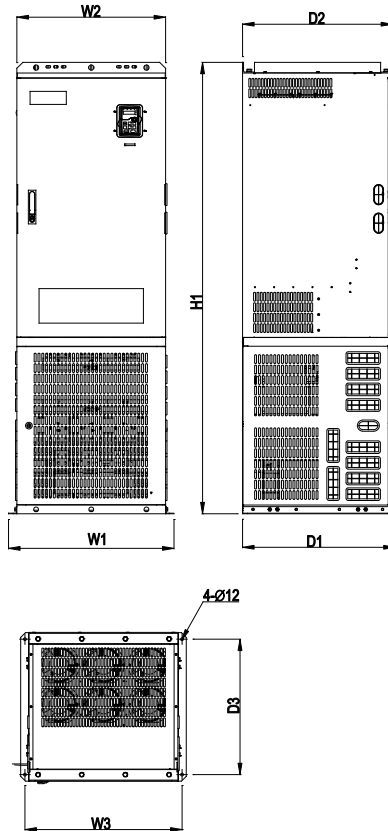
Single-unit installation dimension for 380V 355–500kW and 660V 400–630kW models
